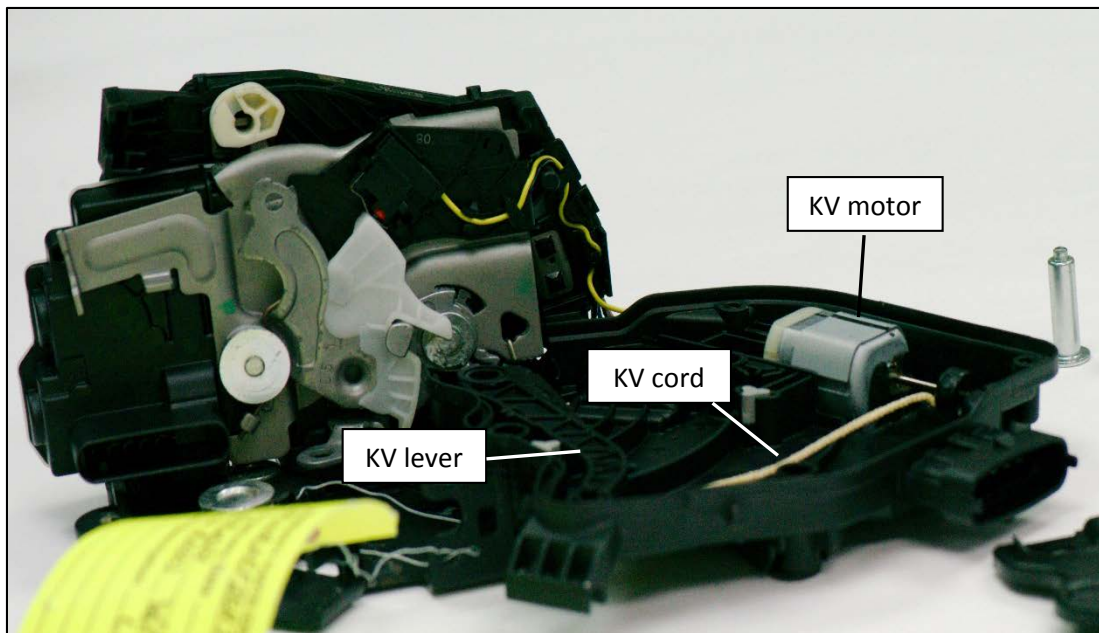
KV drive unit components, cover removed (VOQ 10983285).
